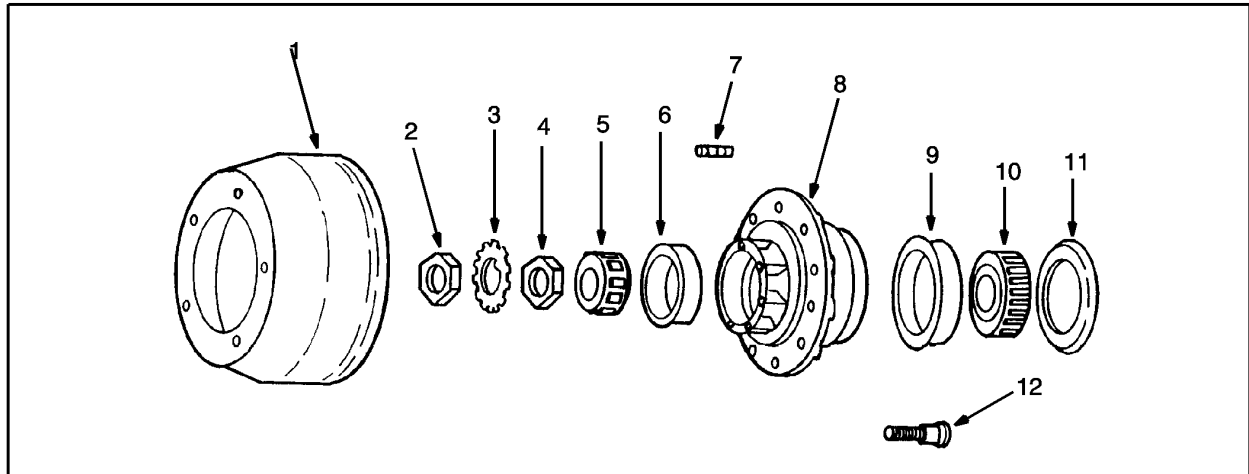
Exploded View of Typical Disc Type Rear Hub Assembly With Outboard Mounted Brake Drum
